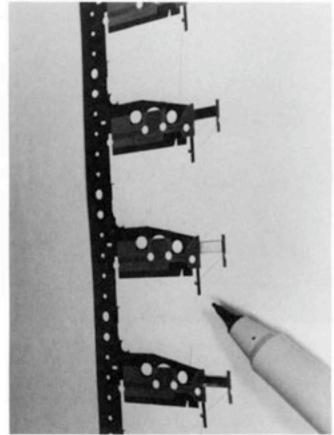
B. An extremely fine solderable magnet wire must be soldered to the terminals. The wire is so thin, that the capillary forces of the molten solder between iron tip and wire did break this extremely thin wire. Only <spirflame> could solve this problem.
